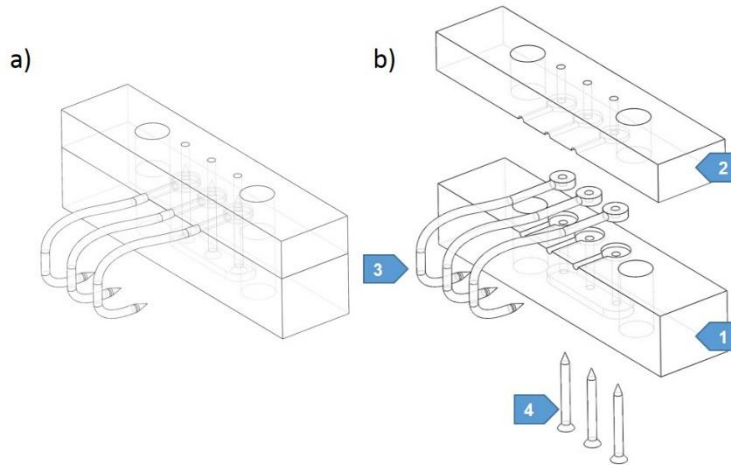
Hooks holder sub-assembly composed by 1) Lower hook holder, 2) Upper hook holder, 3) Hooks and 4) Blocking nails: a) isometric and b) exploded view.
